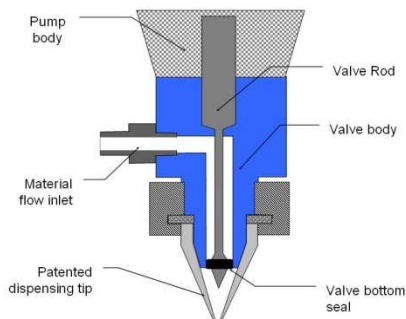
Schematic view of nScript Smart Pump™ valve assembly
